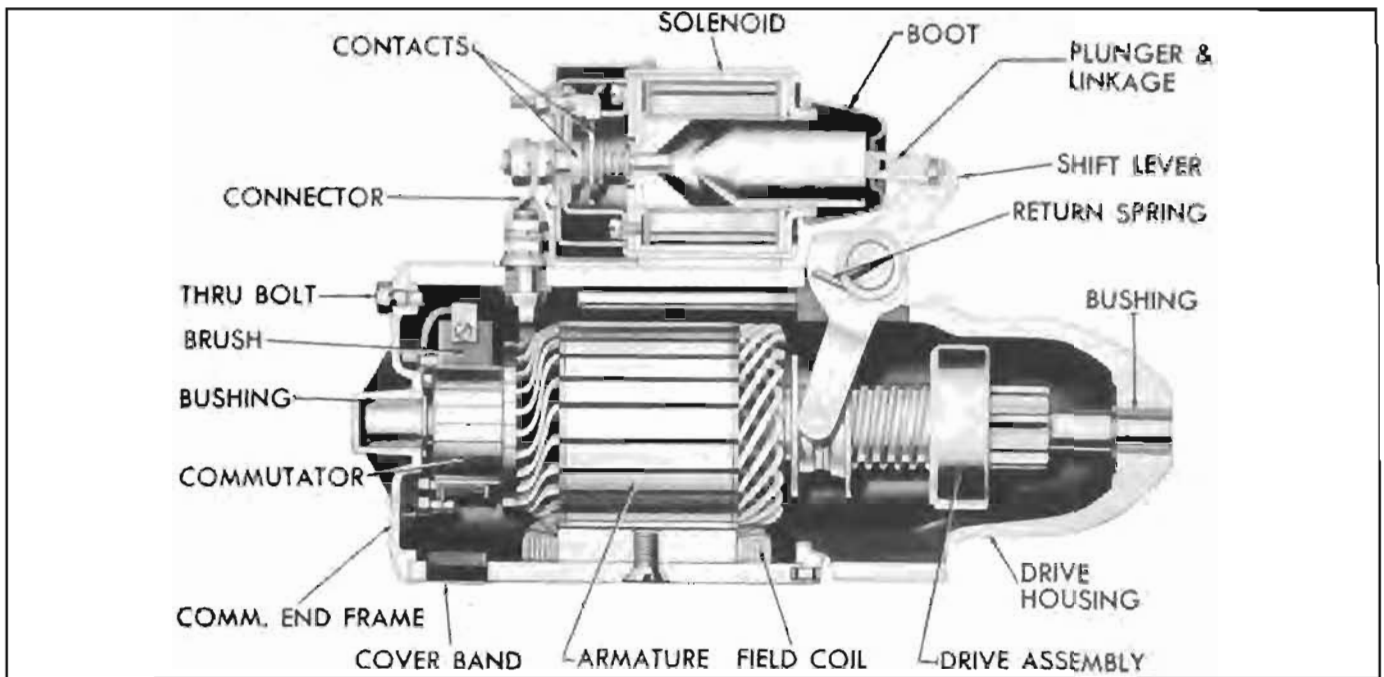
Cranking Motor, Sectional View—Series 40-4750
